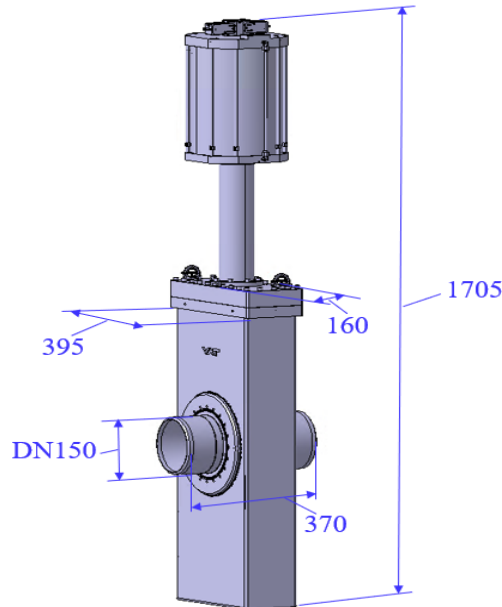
ITER Type 6 All-Metal Gate Ultra-High Vacuum Valve
